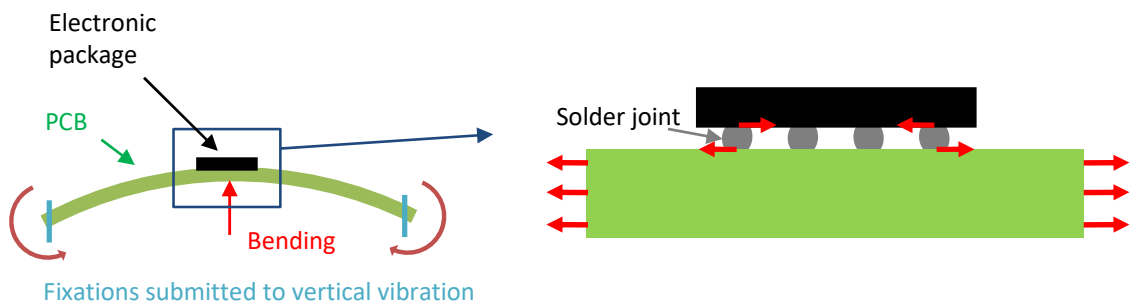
Mechanical shear stresses induced by the bending of the PCB due to vibration loading from the environment of a BGA package
